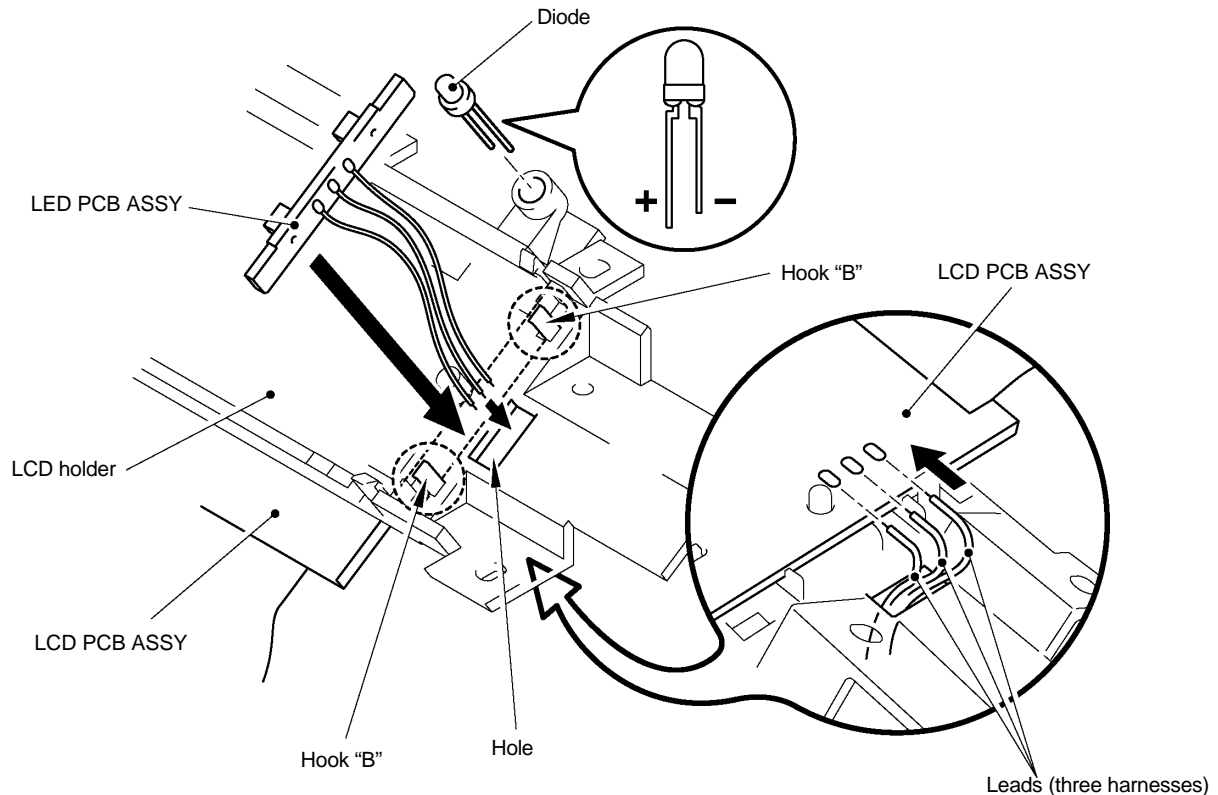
Reassembling the LCD Module Unit (2)
